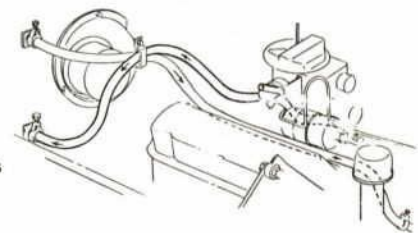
221 And 260 C.I.D. Engine Heater Hose Routing
